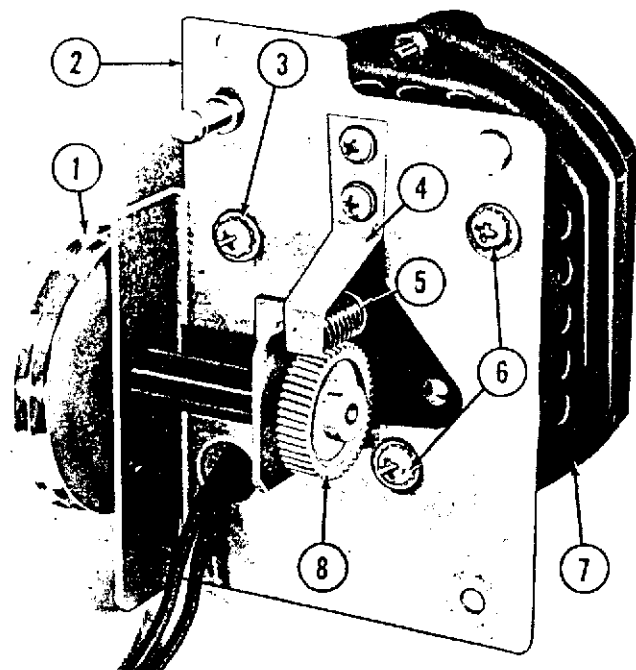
TURNTABLE DRIVE GEAR ADJUSTMENT
